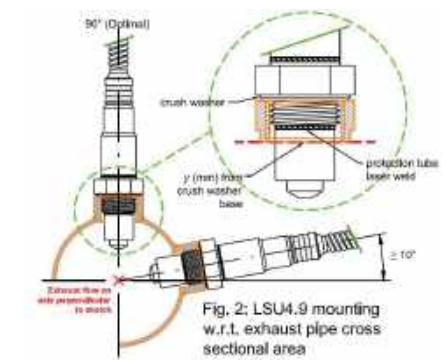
LSU4.9 mounting w.r.t. exhaust pipe cross sectional area
